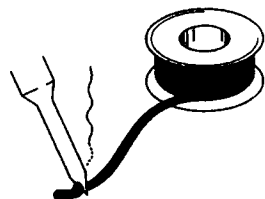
Cutting solder off the roll with your soldering tip
